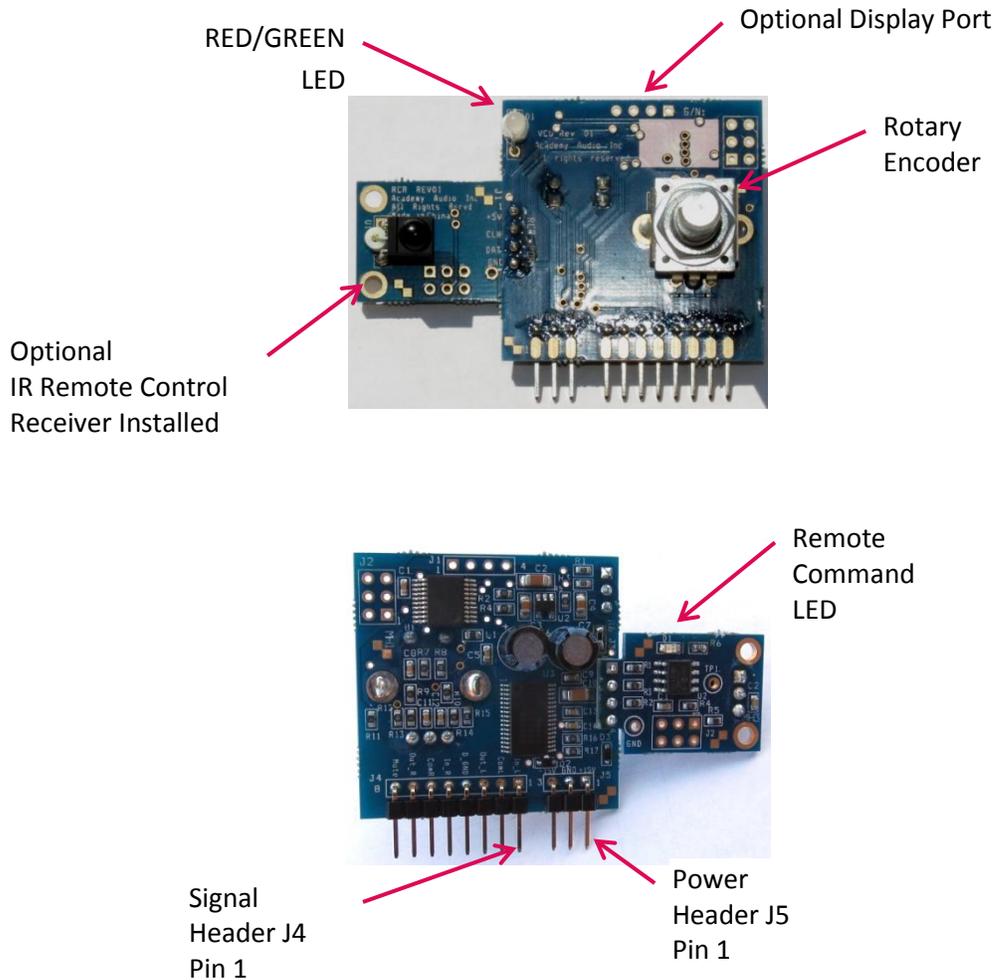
VCU Board Front View (top) and Rear View (bottom).
